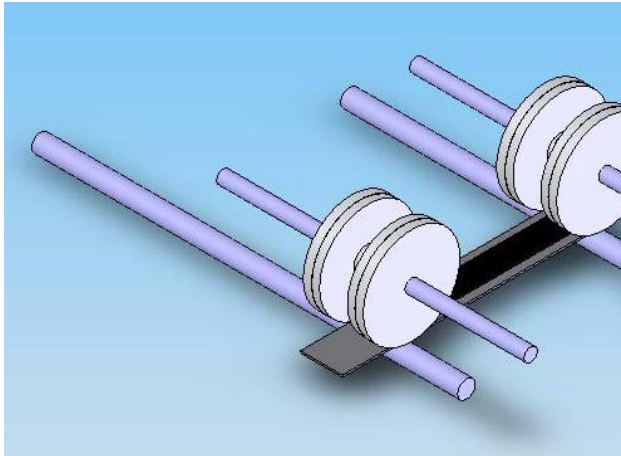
Silicon wafer held between round shoulder bushing and cylindrical bottom drive roller
